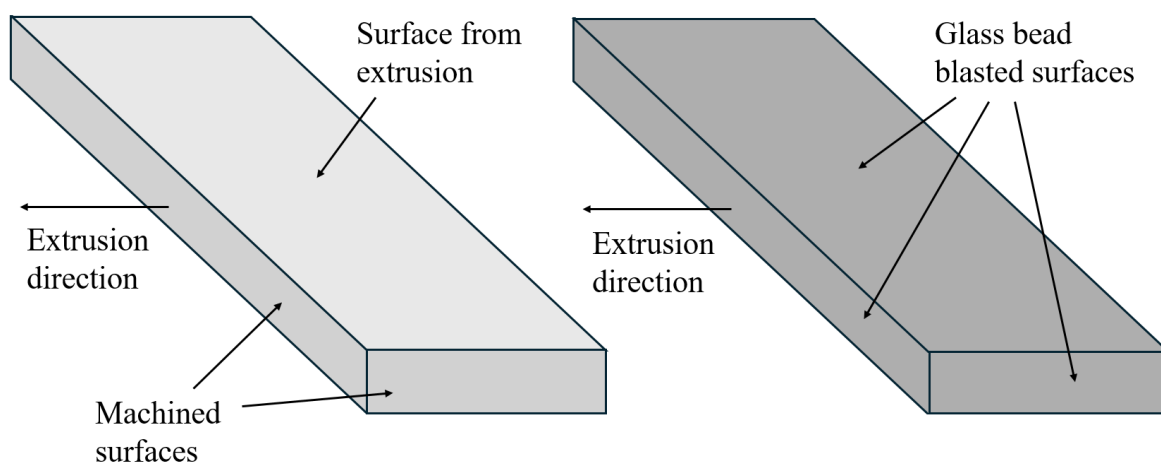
Condition of as extruded (left) and glass bead blasted (right) blocks before pre-corrosion.
